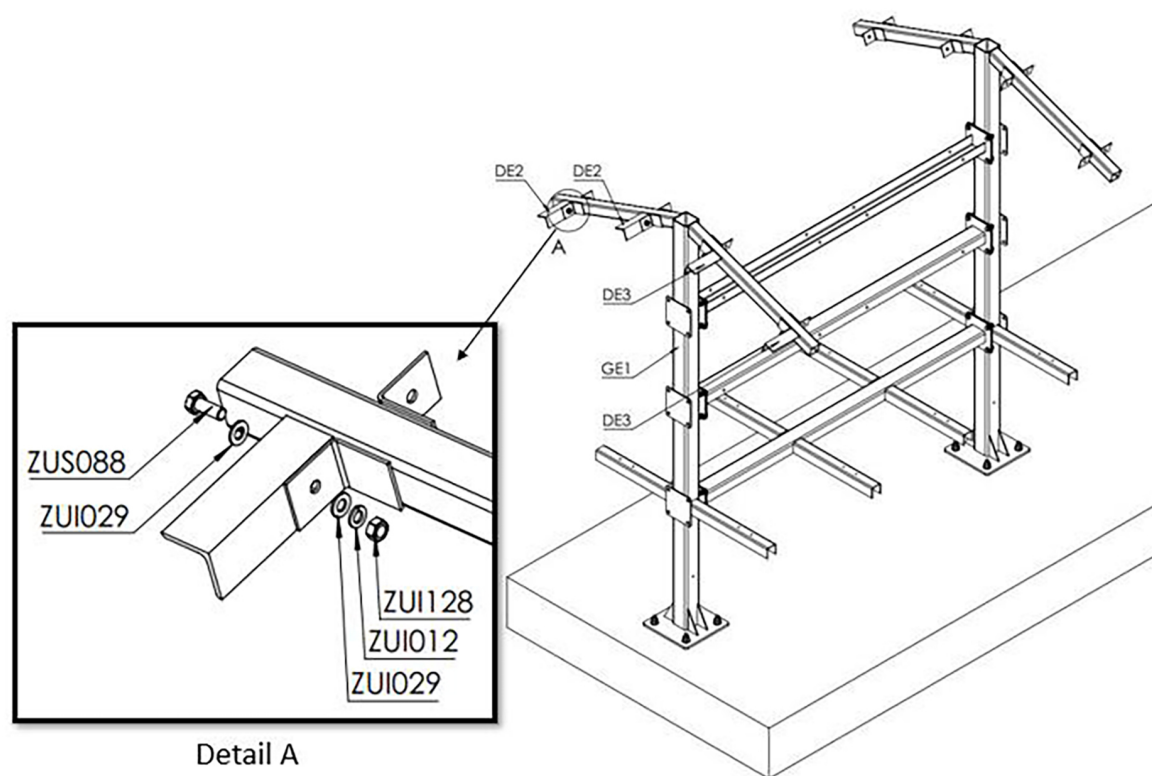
Assembly — Inverter rack — DE2-DE3, GE1 (detailed view)
